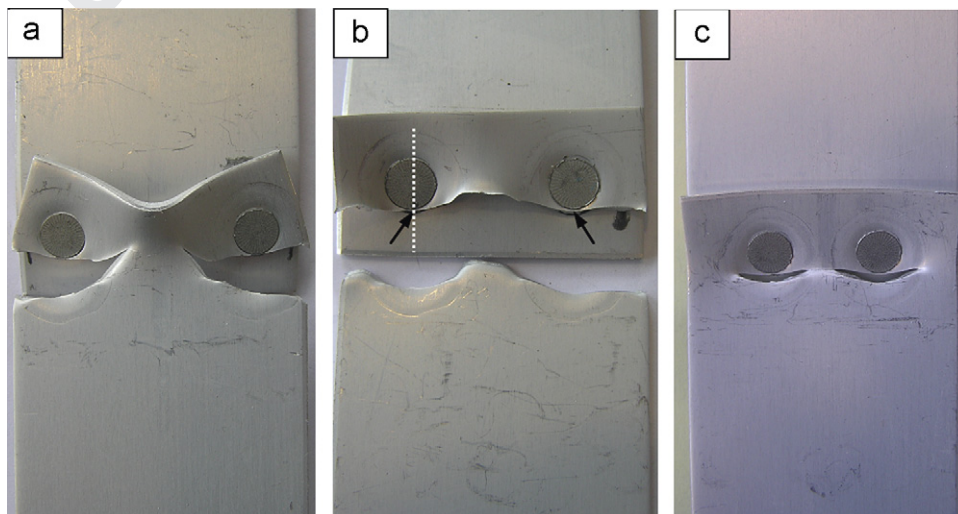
Lap shear fatigue fracture interfaces of specimens tested at higher load amplitudes, 2.025–3.6 kN, for specimen with different edge distances: (a) 8 mm, (b) 11.5 mm and (c) 14.5 mm.
